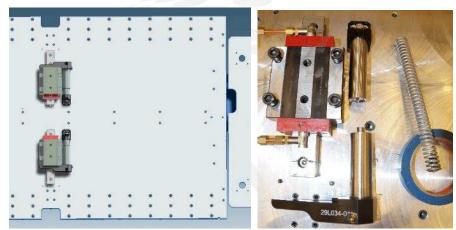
Constant force springs assembled next to carriages (left) constant force spring parts (right)
